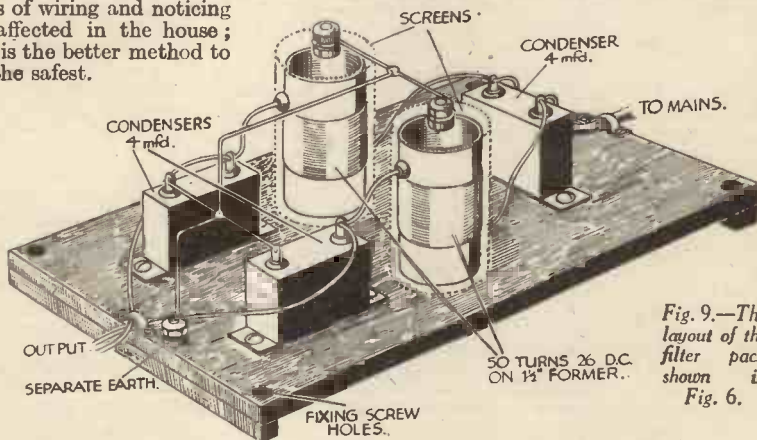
The layout of the filter pack shown in Fig. 6.
